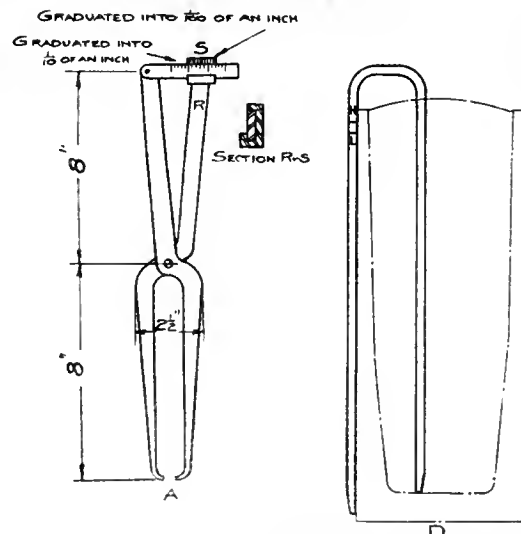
GAUGES USED IN THE GOVERNMENT INSPECTION.
